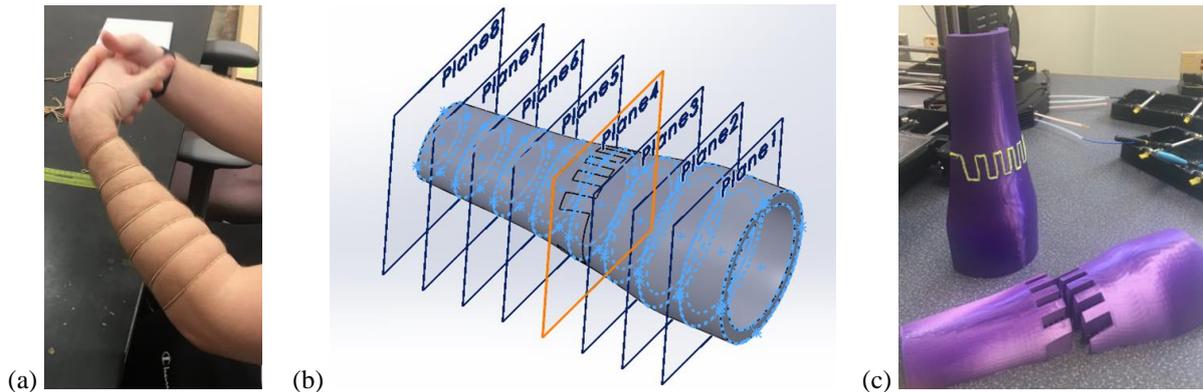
(a) measuring dimensions at 1” increment, (b) CAD file creation (c) Welding 3D printed parts
